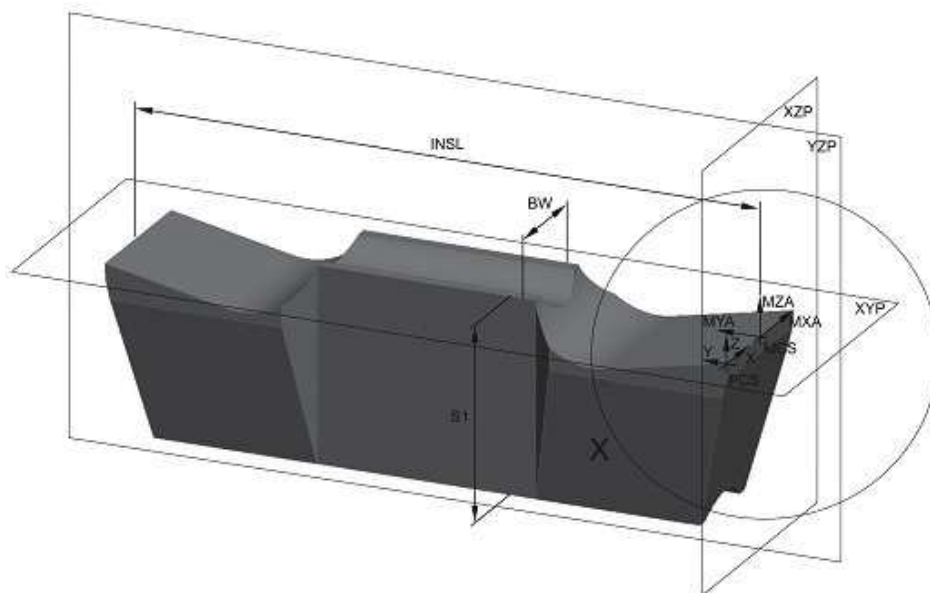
Self-clamping grooving insert with two cutting edges: basic model
